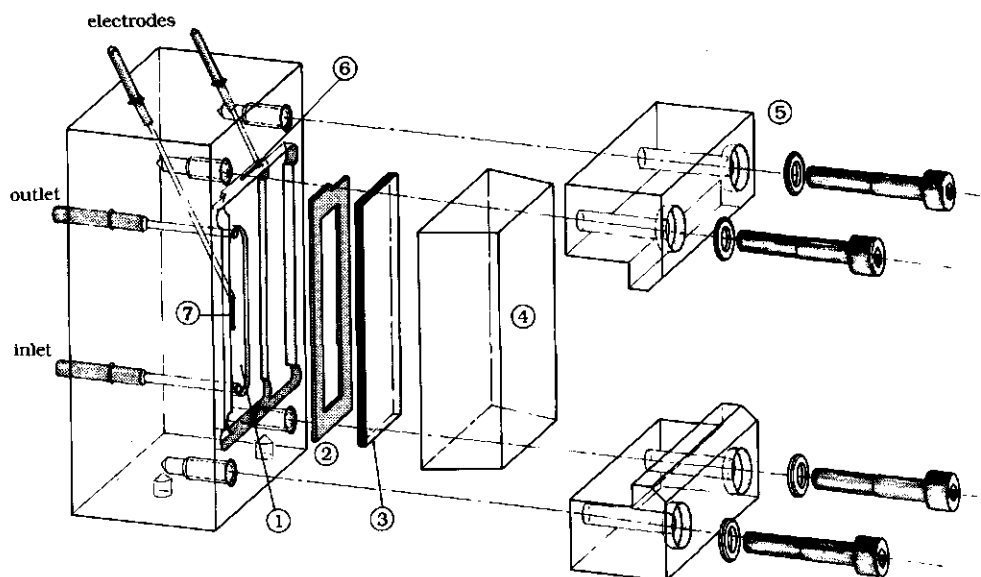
Exploded view of the TIRF flow cell and its components.
